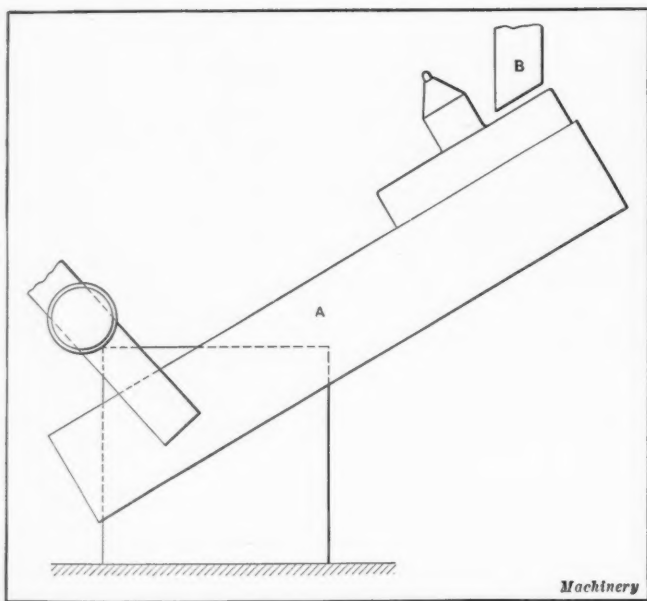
Using Master Angle-block to get True Angle on Grinding Wheel
